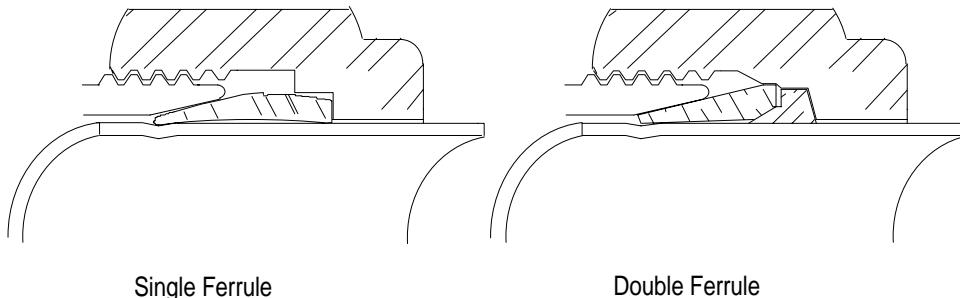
Metal Single and Double Ferrule Compression-type Vacuum Fittings
